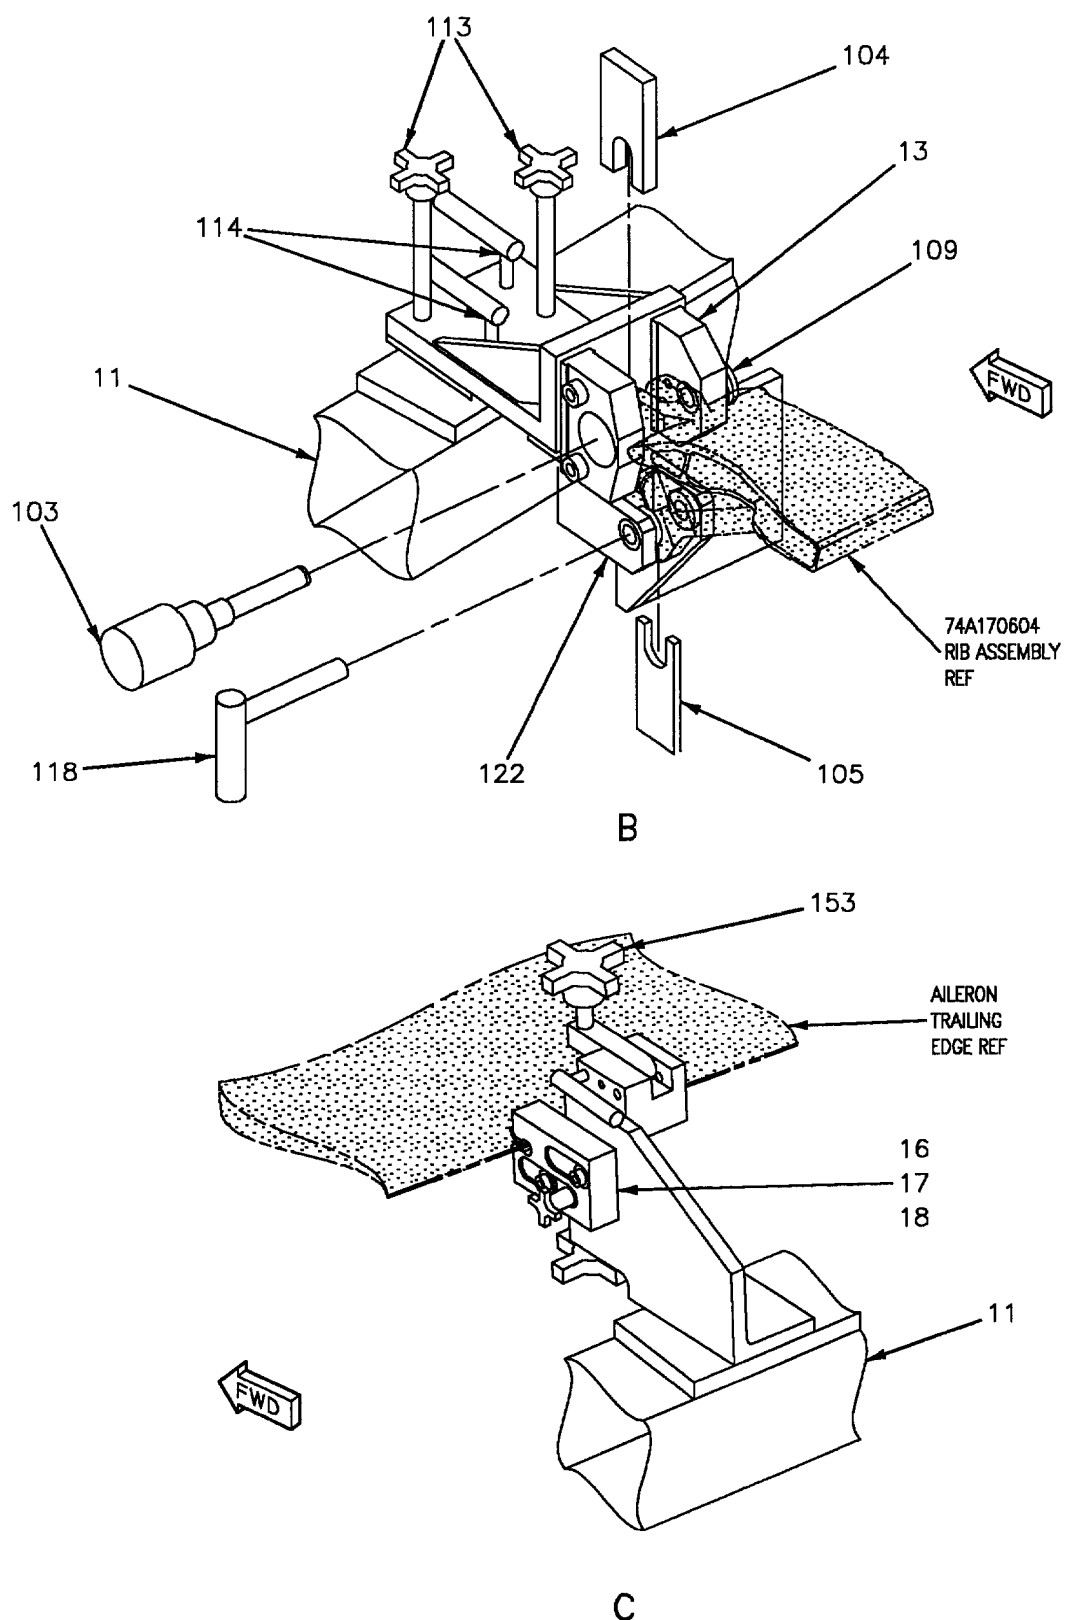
Loading Aileron Assembly into Maintenance Fixture (Sheet 2)
